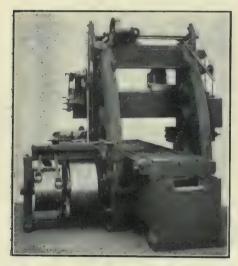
Back View, Four Wheel Right Angle Drive.
